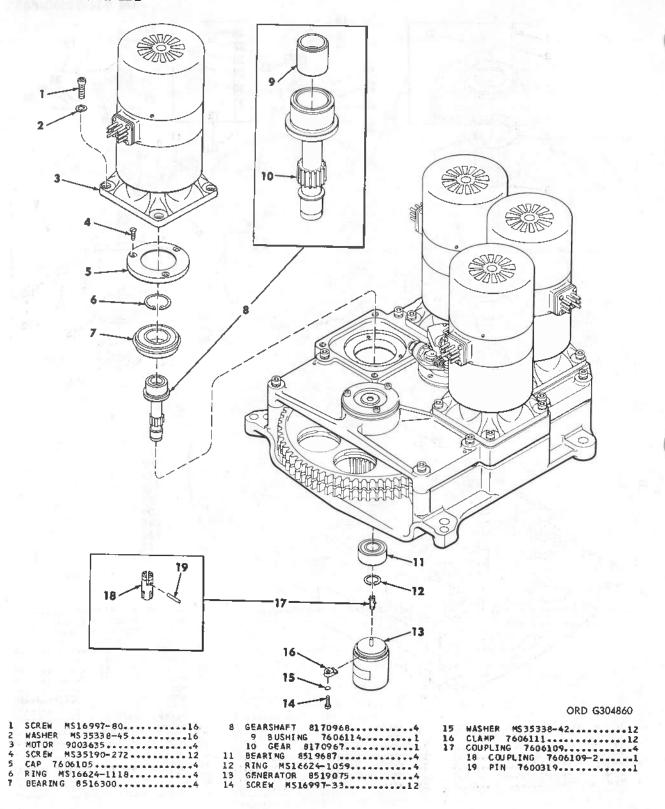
DRIVE /8170973/-PARTIAL EXPLODED VIEW /SEE FIGURE 173 FOR MEXT HIGHER ASSEMBLY/
